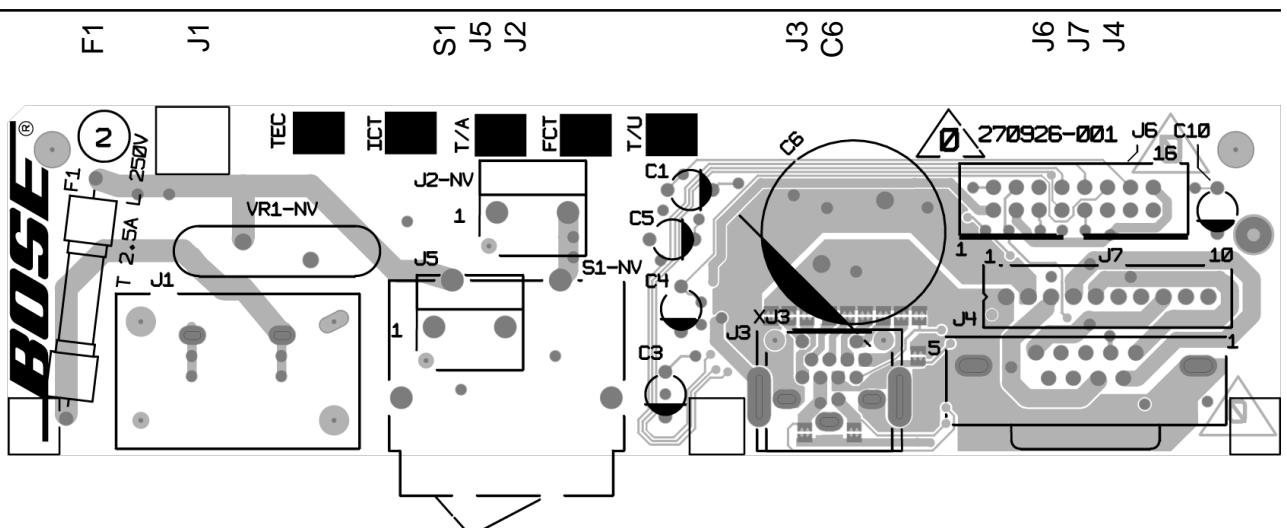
Bass Module Input/Output PCB Bottom Side Etch Layout Diagram
